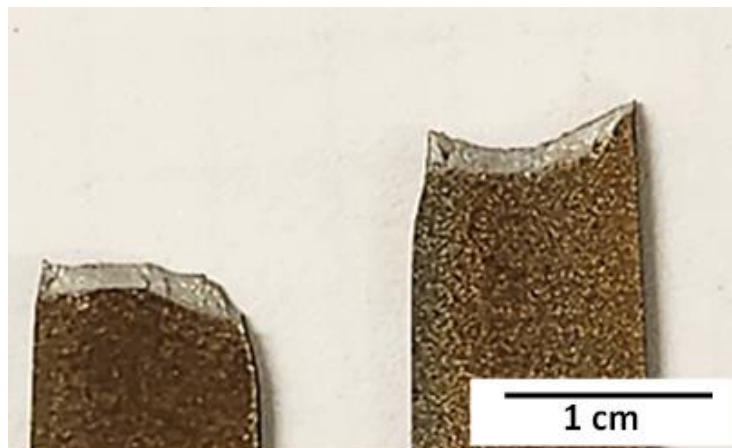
Quasistatic tensile test 200°C fracture sample Q200-A
